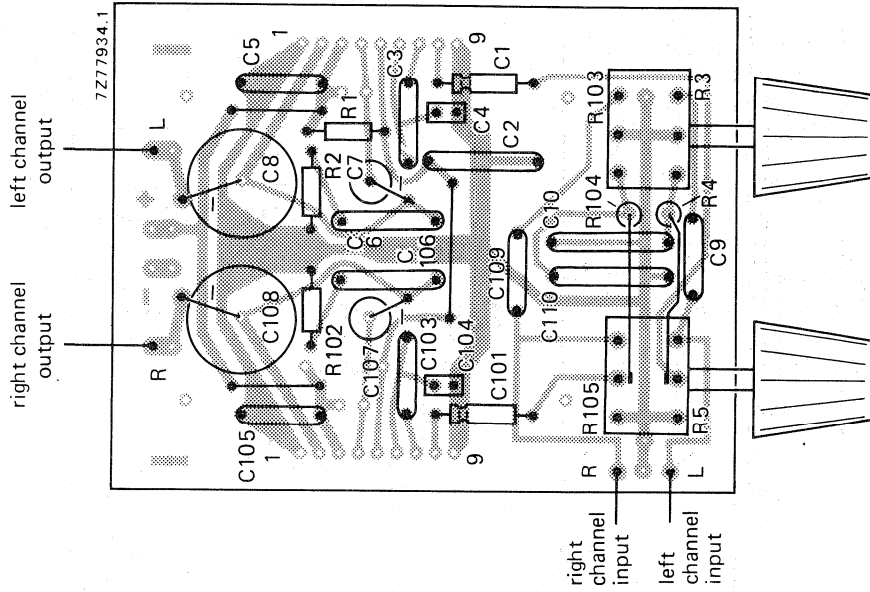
Component side of printed-circuit board showing component layout used for the circuit of Fig. 12. Balance control is not on the p.c. board.
